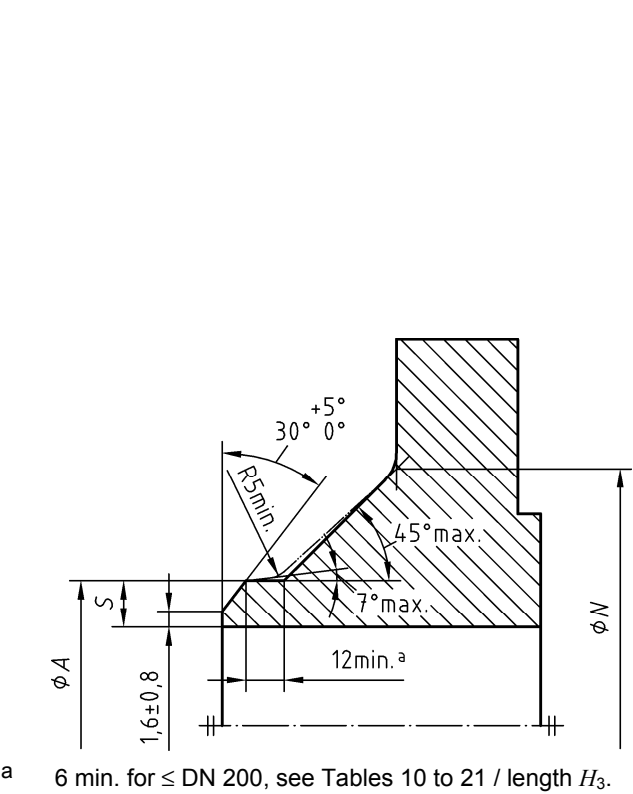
Welding end connection for wall thickness S up to 22 mm
